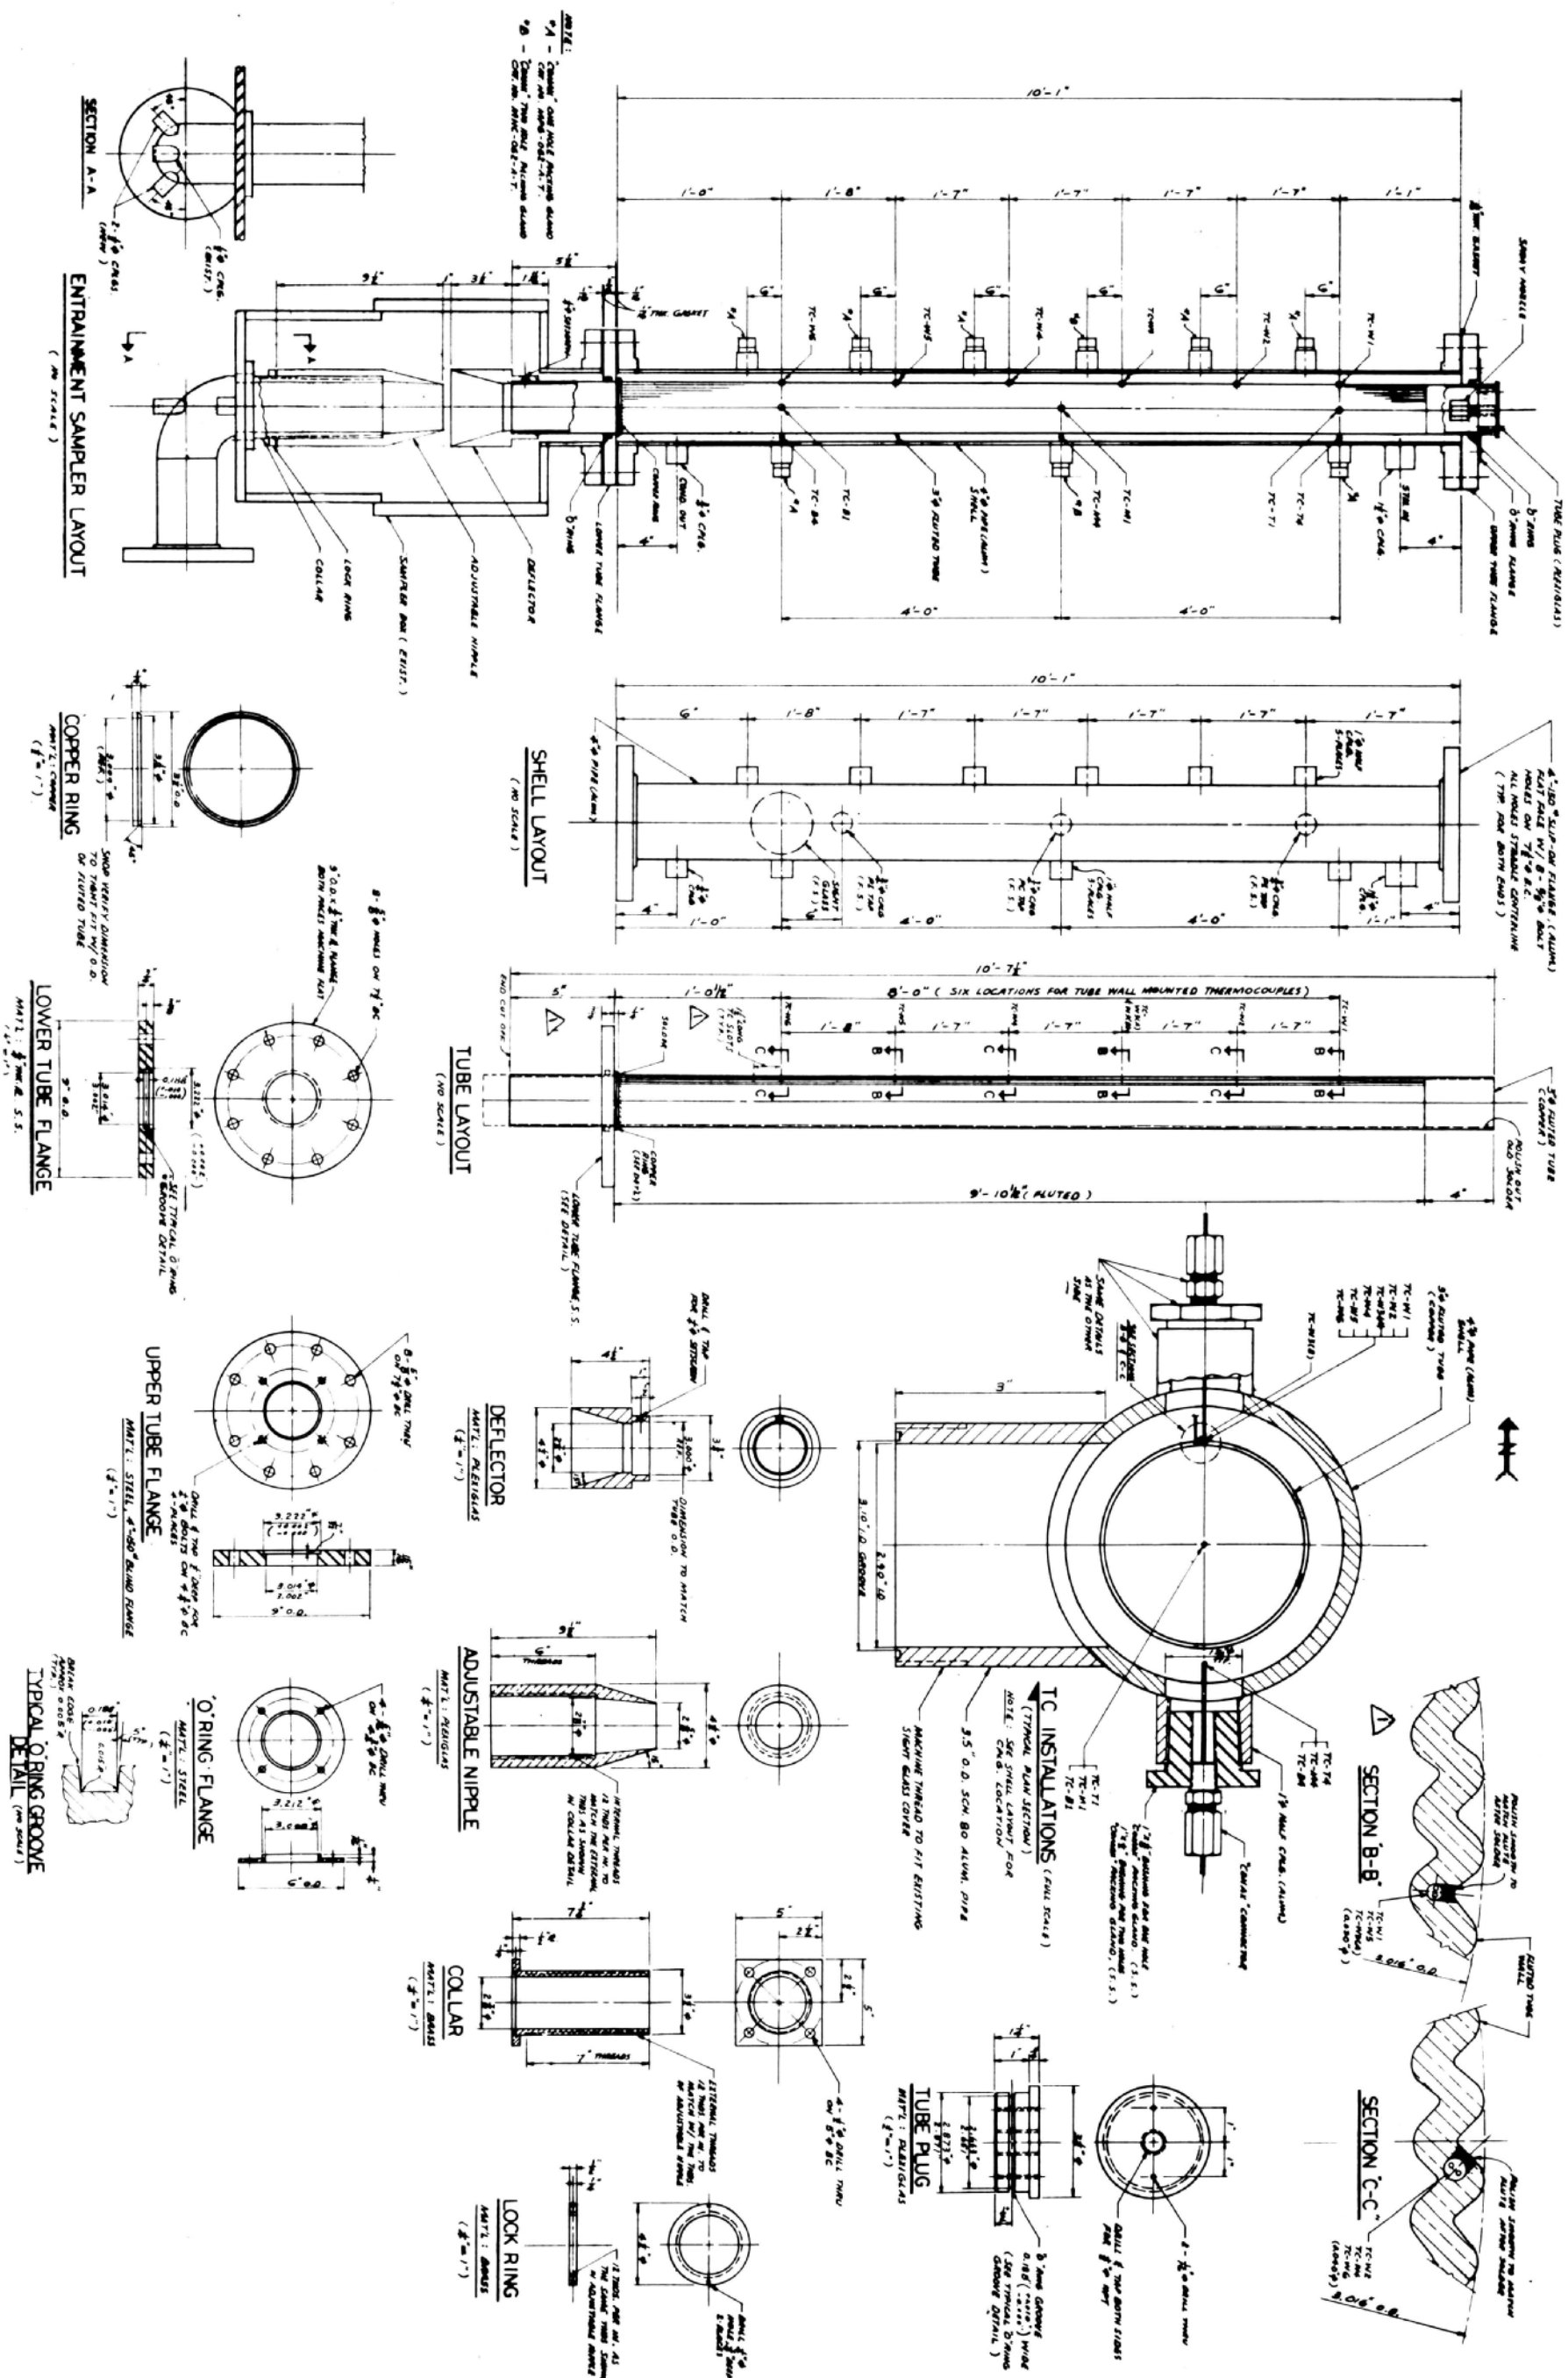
Mechanical details for three in. fluted tube installation.
